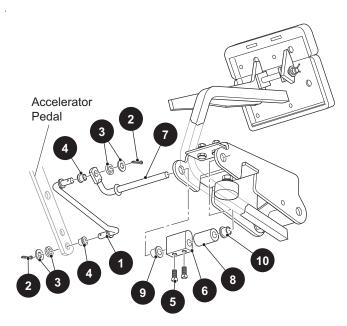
Parking Brake Release Linkage and Kick-Off Cam Removal and Installation
